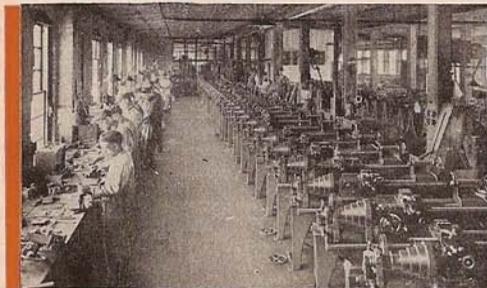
Assembly Line Where from 25 to 50 Lathes of One Size are Assembled at a time.
